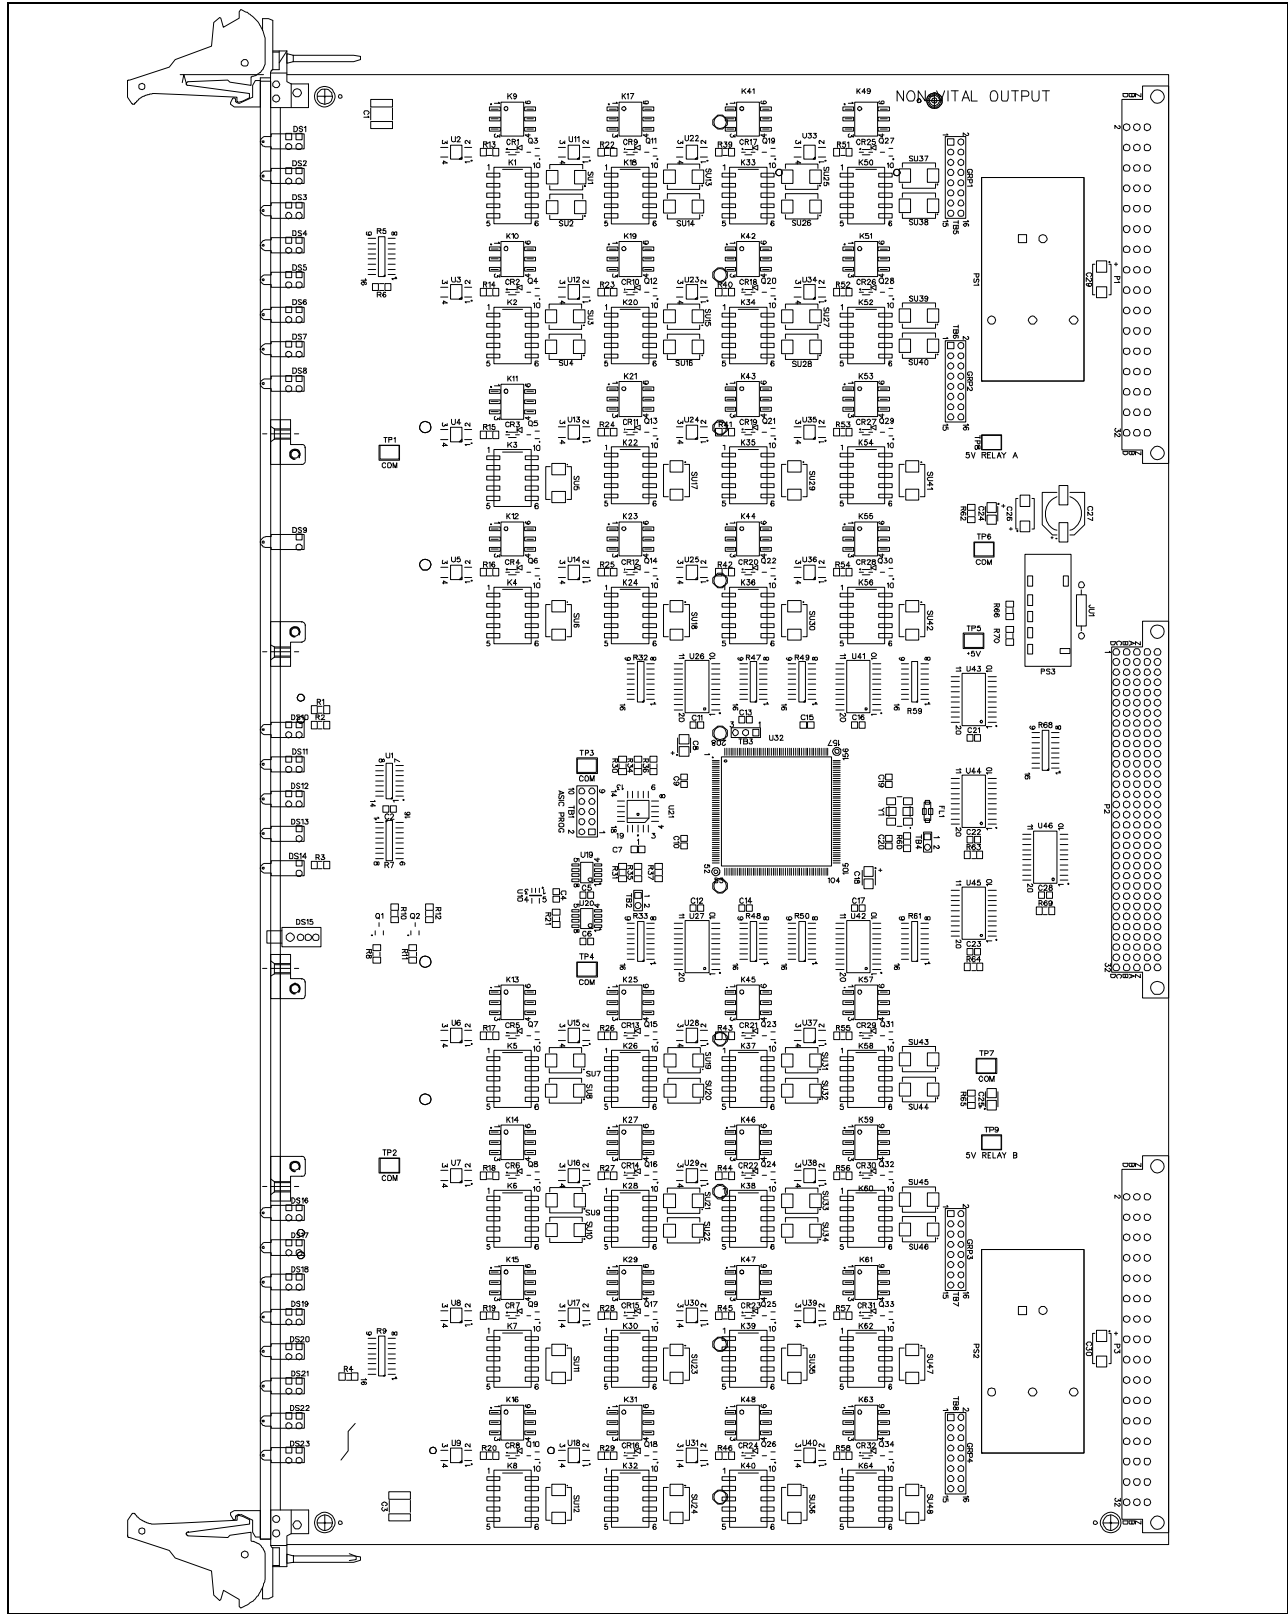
NVO Board, P/N 31166-458-01 and -02
